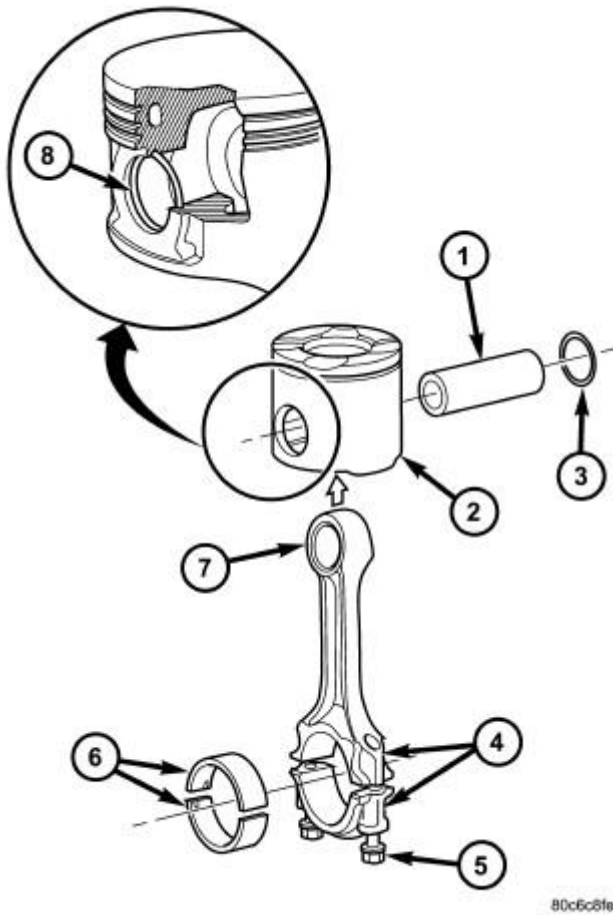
PISTON AND CONNECTING ROD ASSEMBLY
